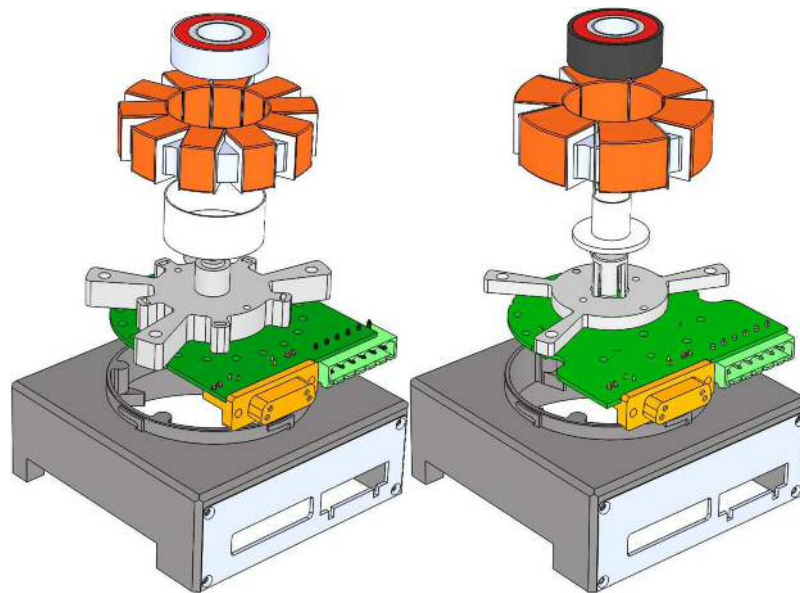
Exploded view of 5pd (left) and 6ps (right). From top down: rotor with sensor target, back iron, magnet, and bandage; stator with core, coil carriers, and windings; touchdown bearing; sensor carrier (also carrying touchdown bearing in 6ps arrangement); PCB for power and signal connection; housing.
